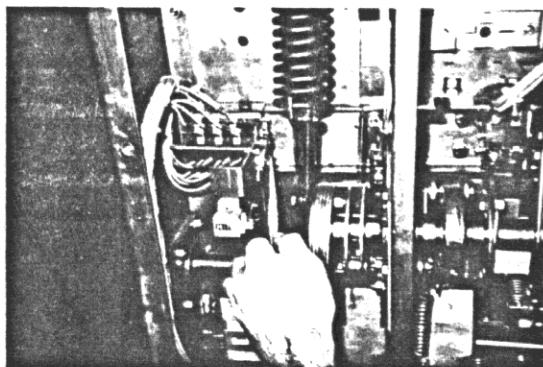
Disconnect Motor Lead Terminals. Remove Motor Mounting Bracket Bolts.
